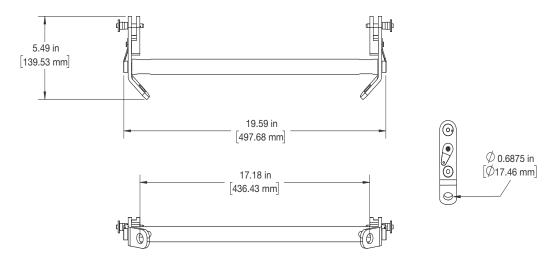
PBF-LINA Pull-Back Frame Dimensions
